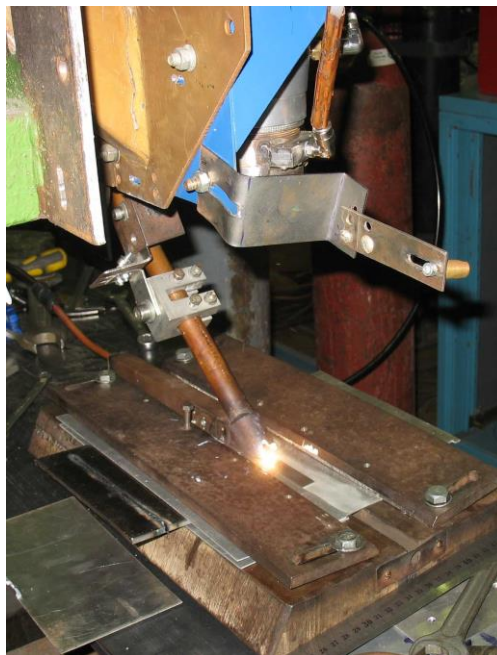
Laser welding-soldering process of OT4 alloy with AMg6 on CO₂-laser "TRIAGON"
